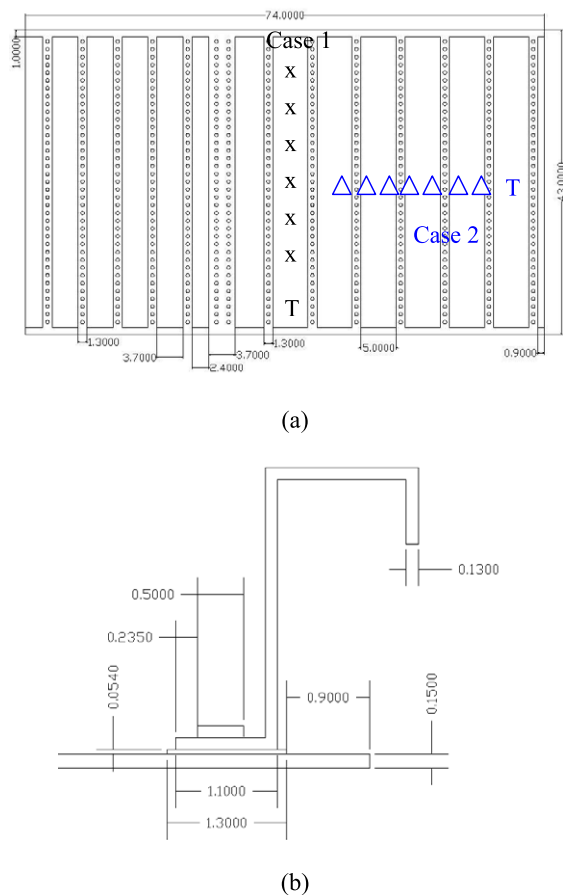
Wing skin structure: (a) sketch of the rivet row and angle beam transducer locations; (b) typical geometry of a stiffener riveted to the skin (all scales are in centimetres).
